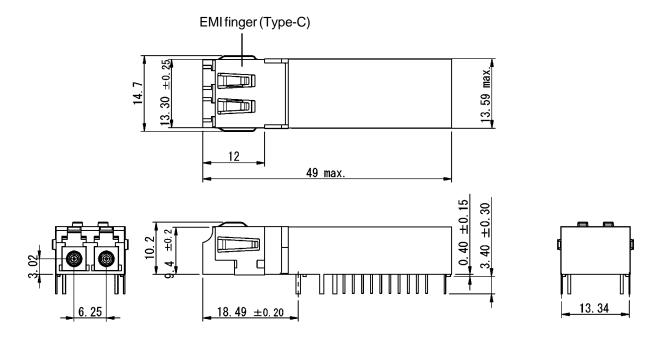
Outline Dimensions (SCM6001-GL-Z#)
